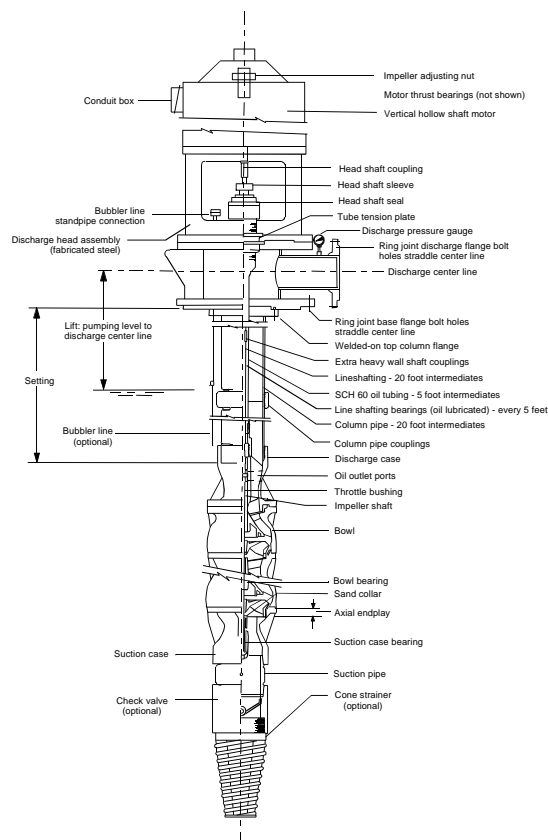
Typical lineshaft turbine pump with an enclosed oil-lubricated shaft.
